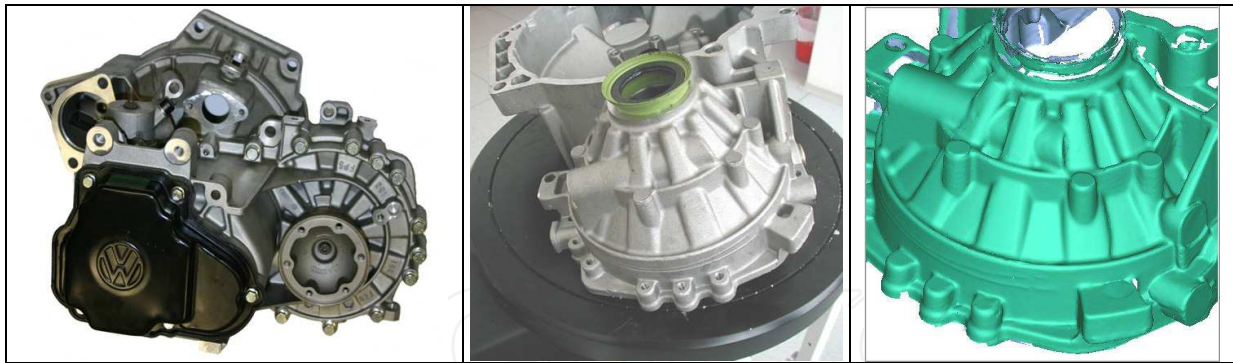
Real VW Gearbox & Its Scan (Gregor,M.&Medvecký,S.,2010)
